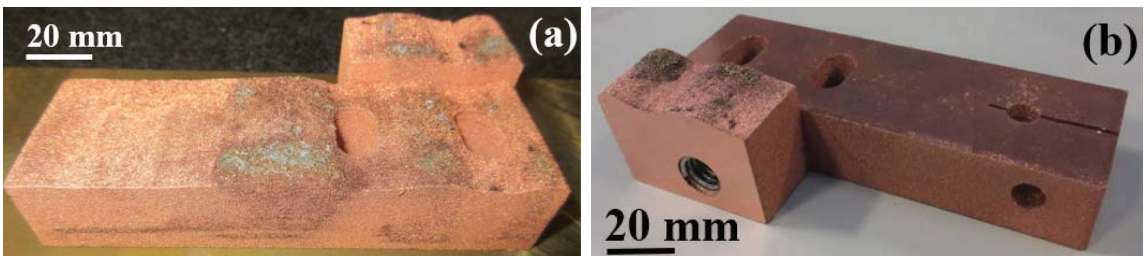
(a) Printed Lower Electrode Holder Prior to Machining, (b) After Machining
